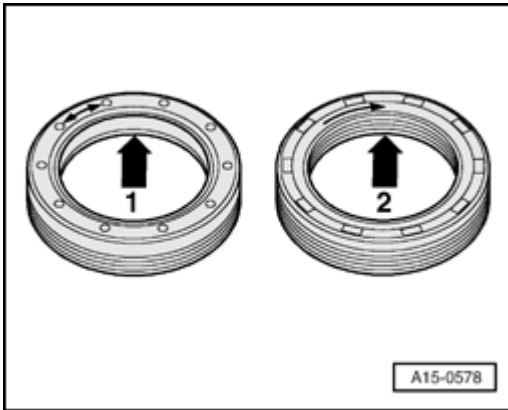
Identifying A PTFE Seal (Teflon) & Inner Coil Spring Type Seal
